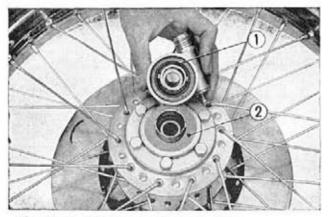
① Speedometer gear box ② Gear box retainer
